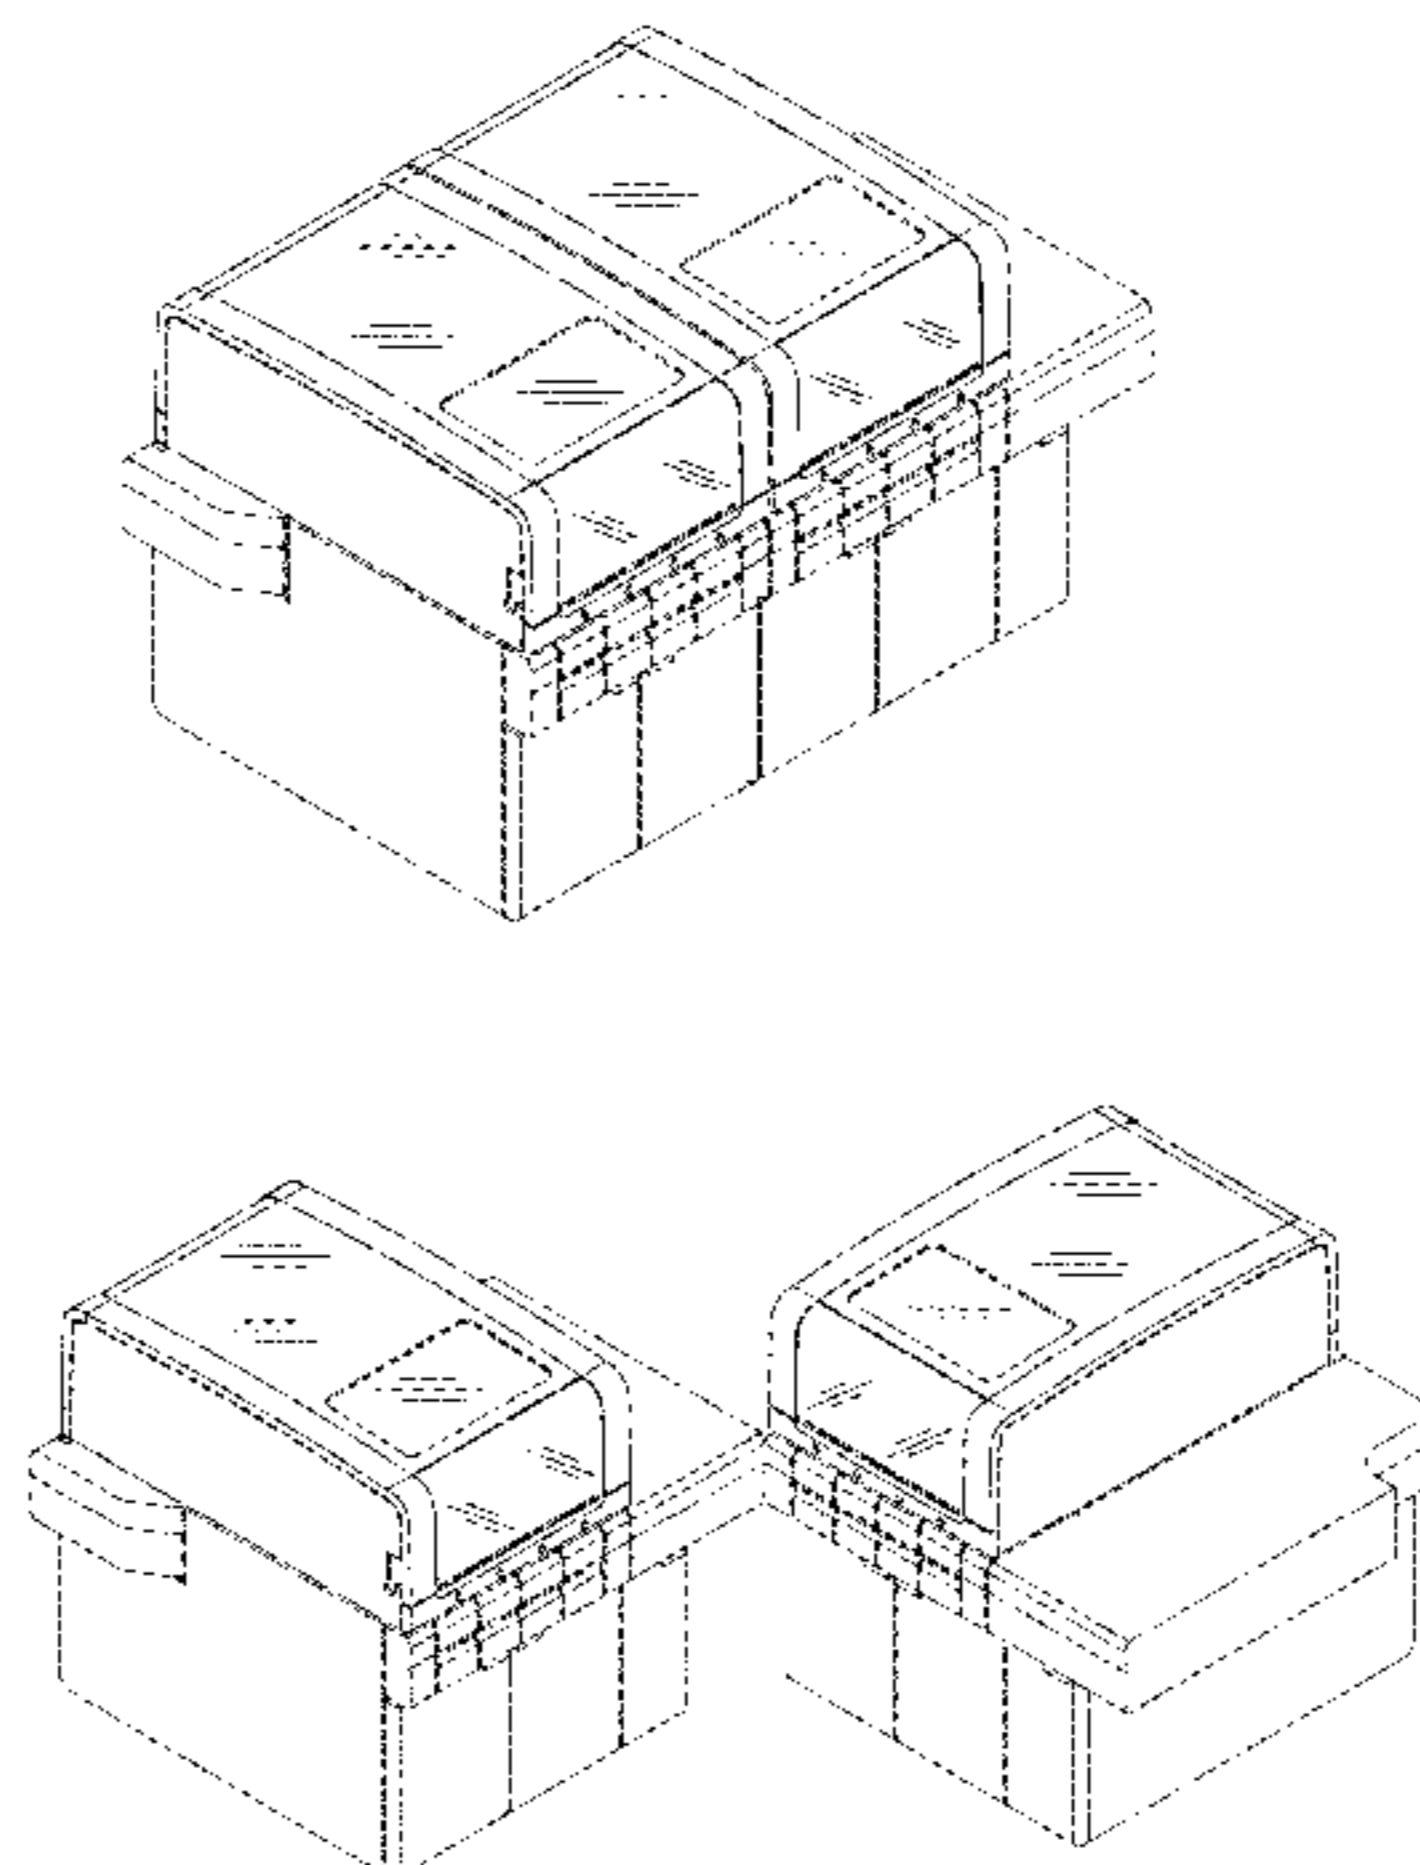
is a right side elevational view of a system including multiple instrument modules and arrangement thereof;
